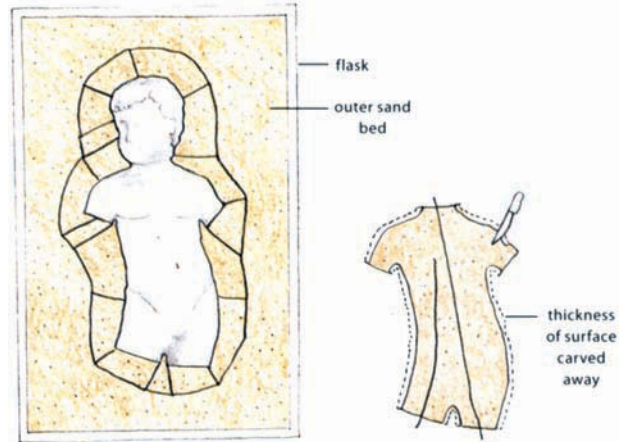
The mold for each section of the foundry model is made inside a box frame called a flask. The mold is made in sections by compacting sand (actually a mixture of sand and clay) against the plaster foundry model. These sections are held in place inside the flask in an outer bed of sand. Once the entire sand piece mold has been made, the plaster foundry model is removed from the flask. Because the sand mold was formed in pieces, the rigid model can be removed without damaging the piece mold. To speed the molding process, the foundry models are sometimes cut into sections, resulting in bronzes cast in numerous parts.
